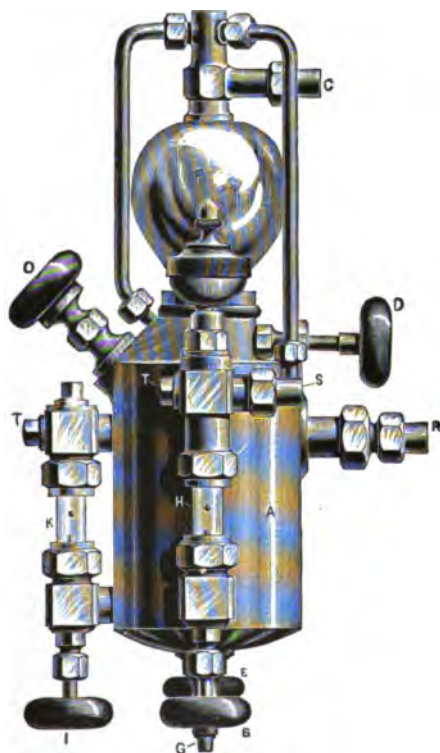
THE "DETROIT" No. 3 TRIPLE LOCOMOTIVE-CYLINDER LUBRICATOR. (Side View.)
